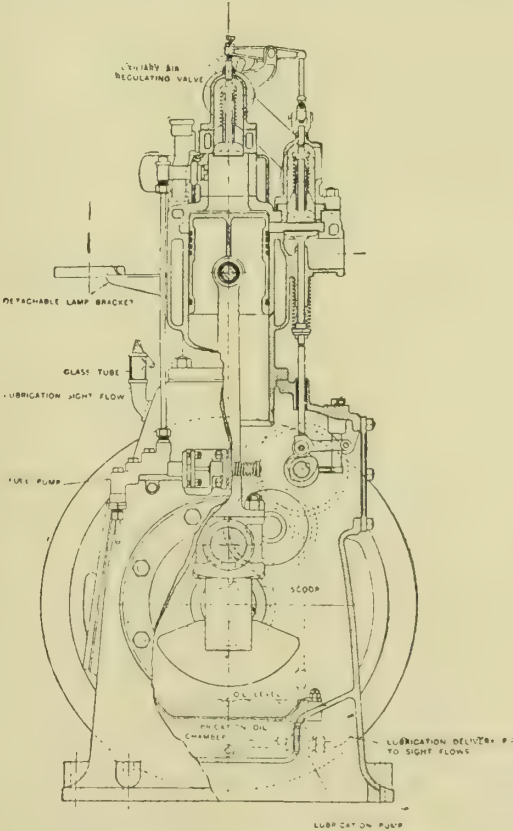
SECTION OF 10 H.P. CROSS OIL ENGINE.
